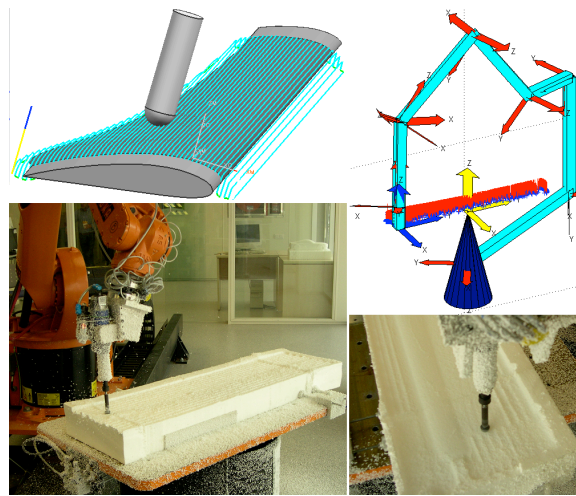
A windmill blade mold is machined with a 5-axes toolpath to test the postprocessor.
